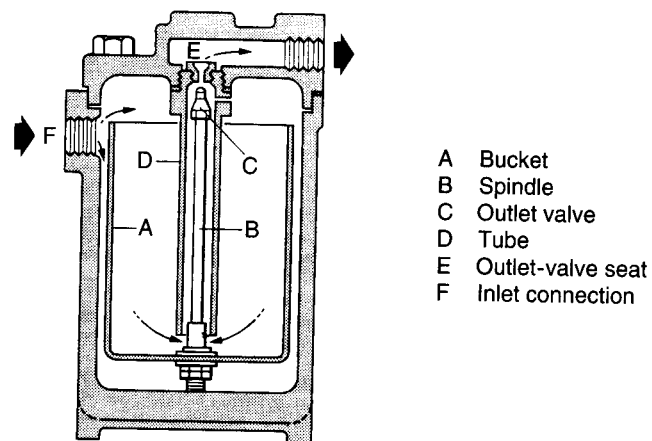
Open-top-bucket steam trap. Courtesy Spirax Sarco, Inc.
